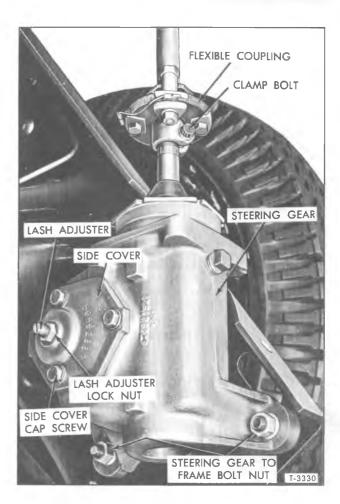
Steering Gear and Shaft (with Rag-Type Flexible Coupling)
